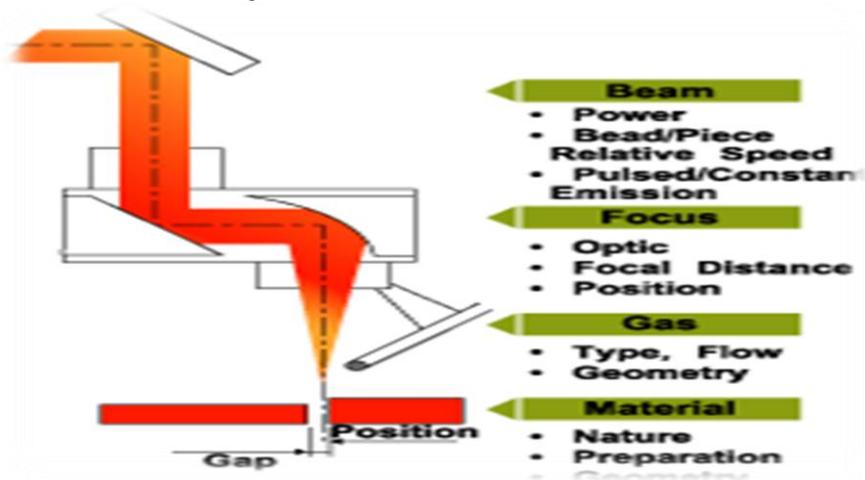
Intelligent controls in automotive-robotic laser welding
